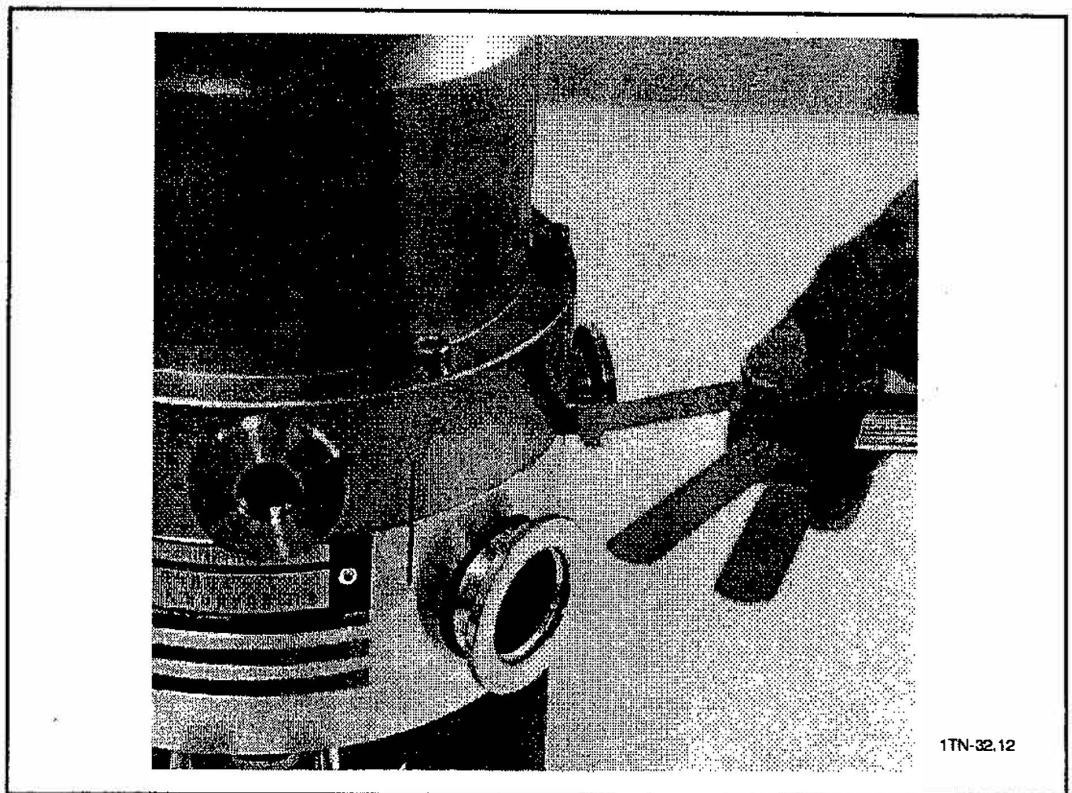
Checking that the Housing/Base Gap is Uniform
